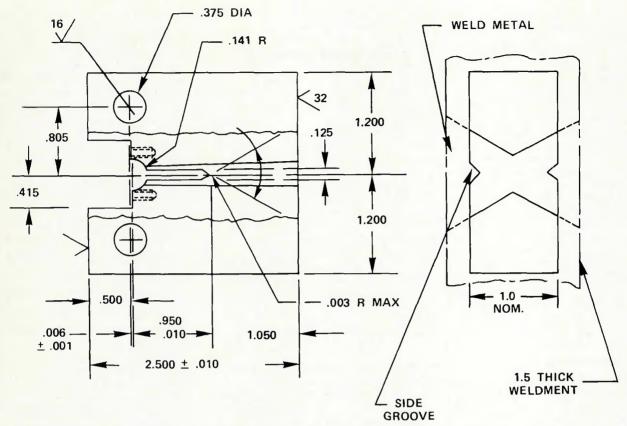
Modified compact specimen (1TCT) for J-integral testing. Dimensions are shown in inches (1 in. = 25.4 mm)
